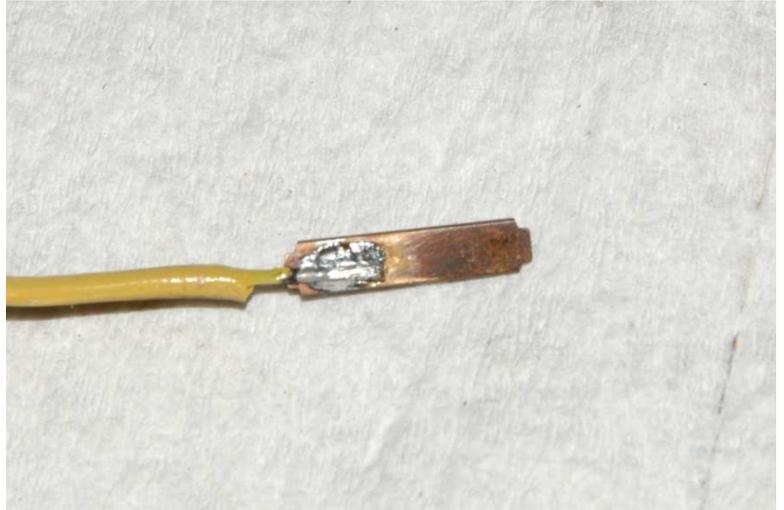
After rail joiner is removed, cut the remaining material back to the edge of the rail.
